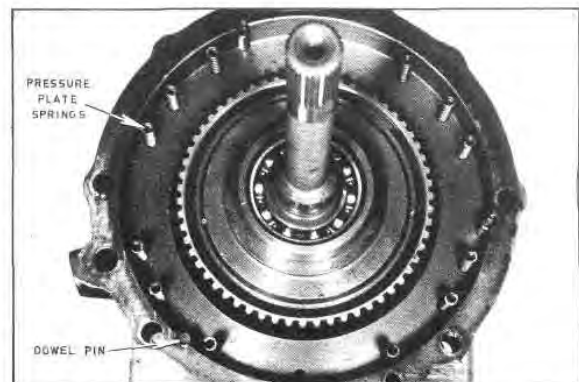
Assembly of the Pressure Plate Springs and Dowel Pins
